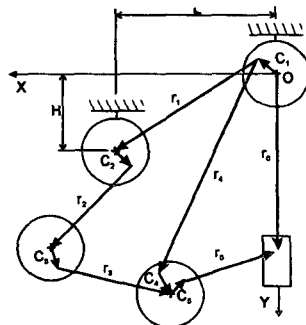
Toggle mechanism with tolerances and clearances
